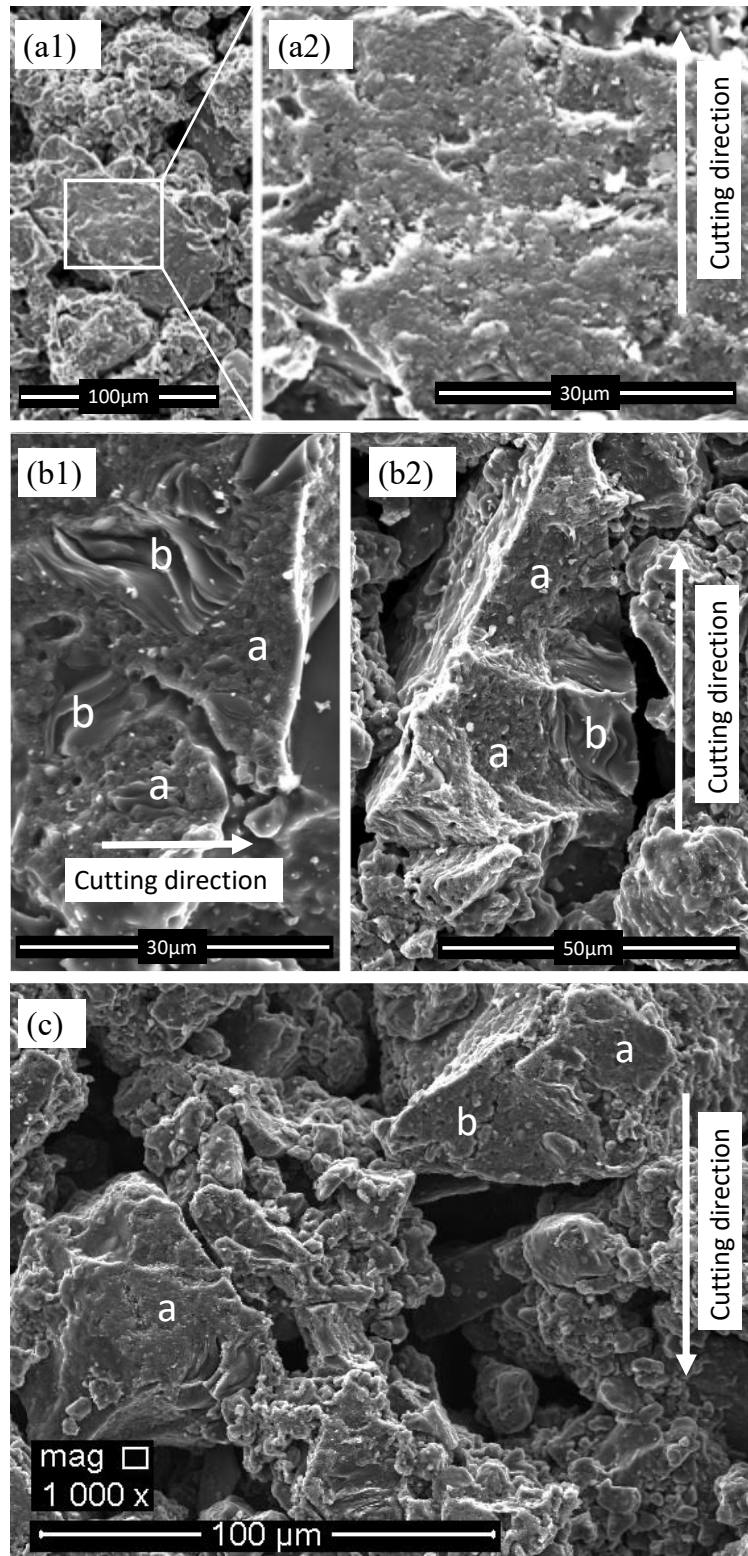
Three typical material removal mechanisms: ((a1) and (a2)) shear fracture, ((b1) and (b2)) brittle fracture, and (c) grain rotation.
